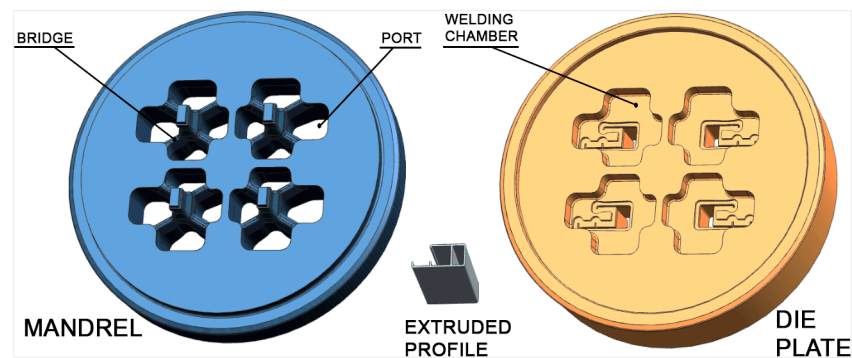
The components of a typical disassembled porthole die: mandrel and die plate.
